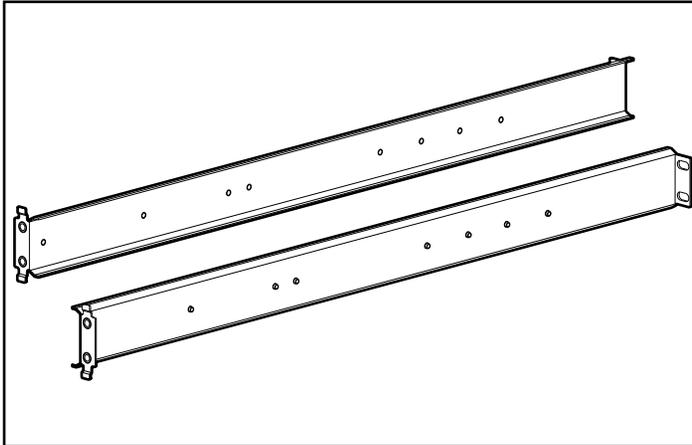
Rack mounting brackets; alignment tabs identify the front flanges
